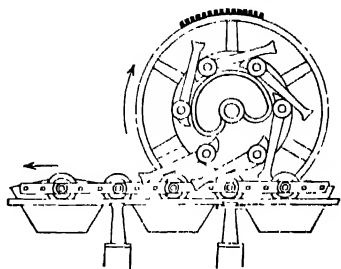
Driving Mechanism of Hunt Bucket Conveyor.
